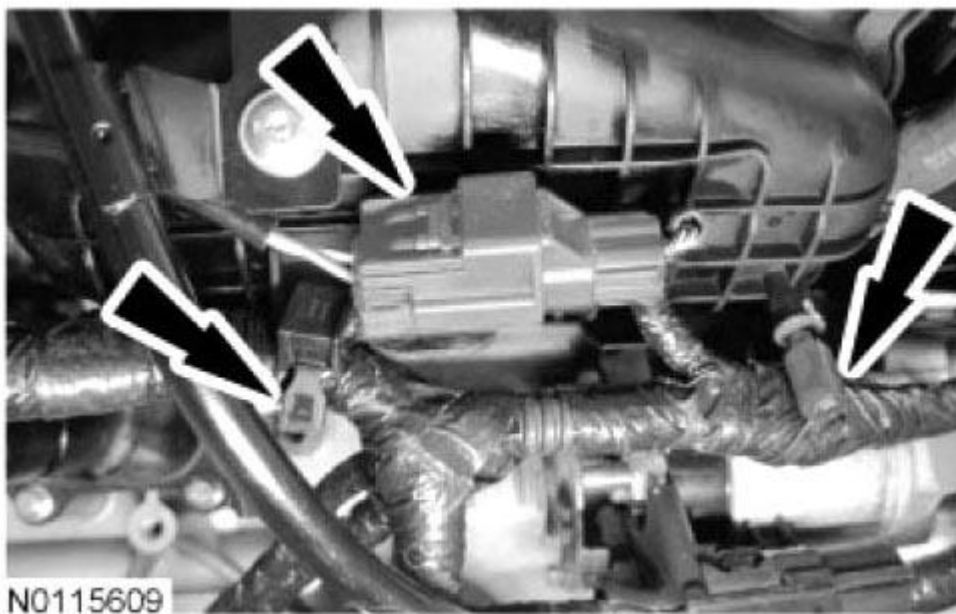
Locating Wiring Harness Retainers From Intake Manifold
